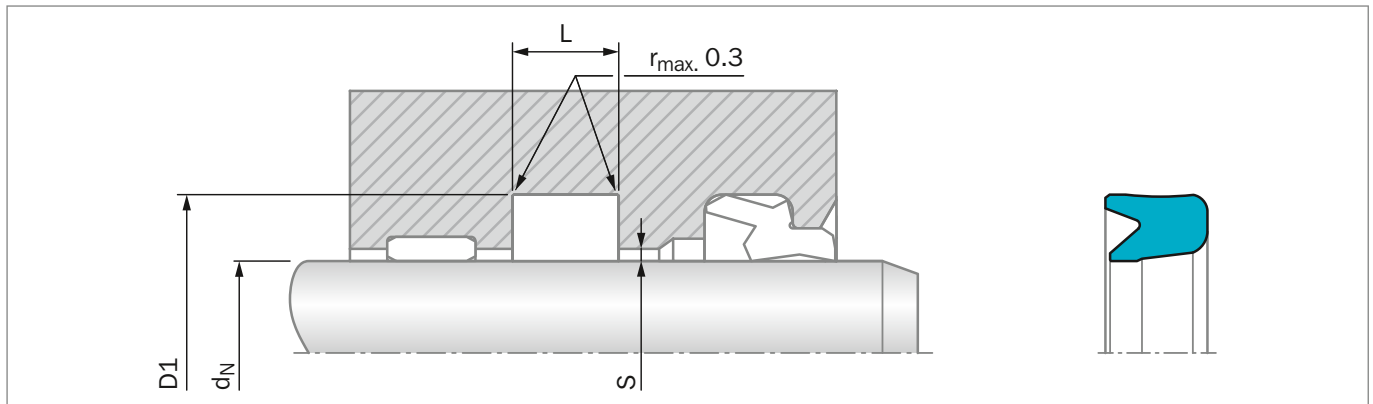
Installation Drawing, Dimension "S" see Figure 67
